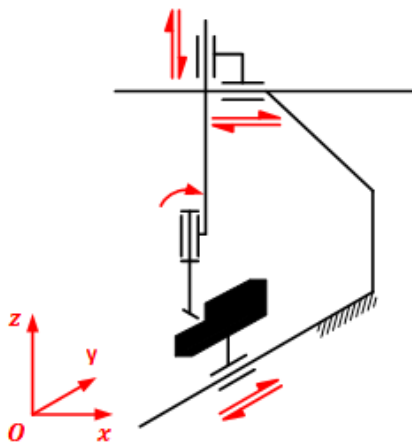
Basic diagram of 3 axes Milling CNC Machine
